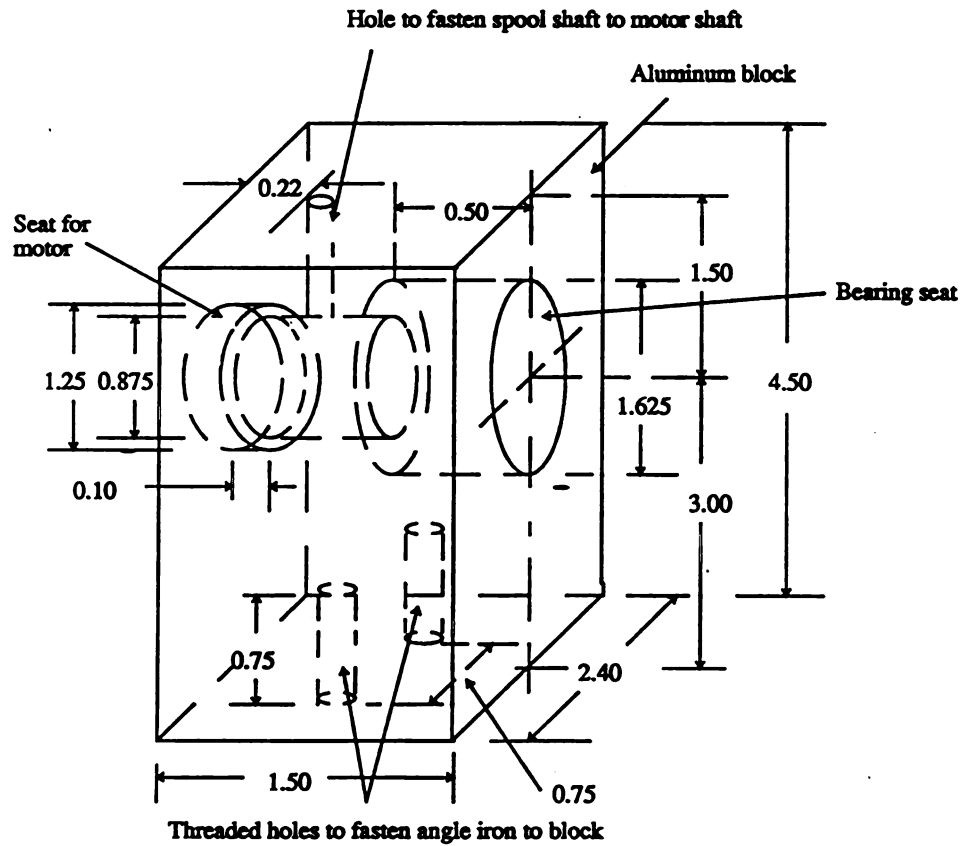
Bearing block for the driven end of the fiber spool shaft.
